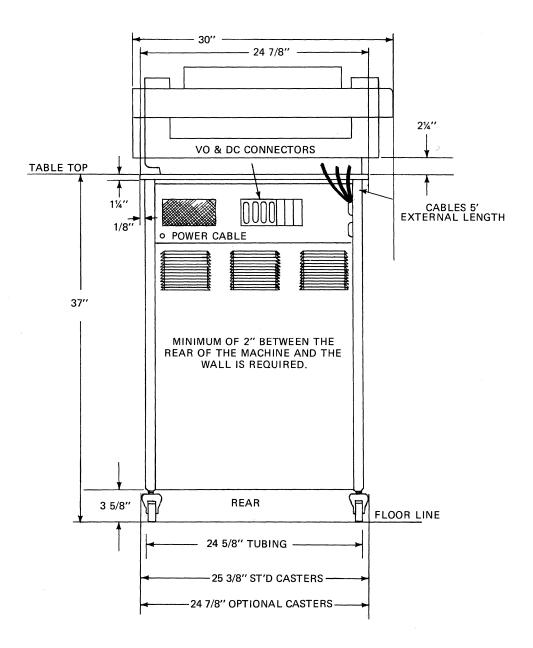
Dimensions, Rear View, Series TC 700 and L 3000 Window Accounting Computer
